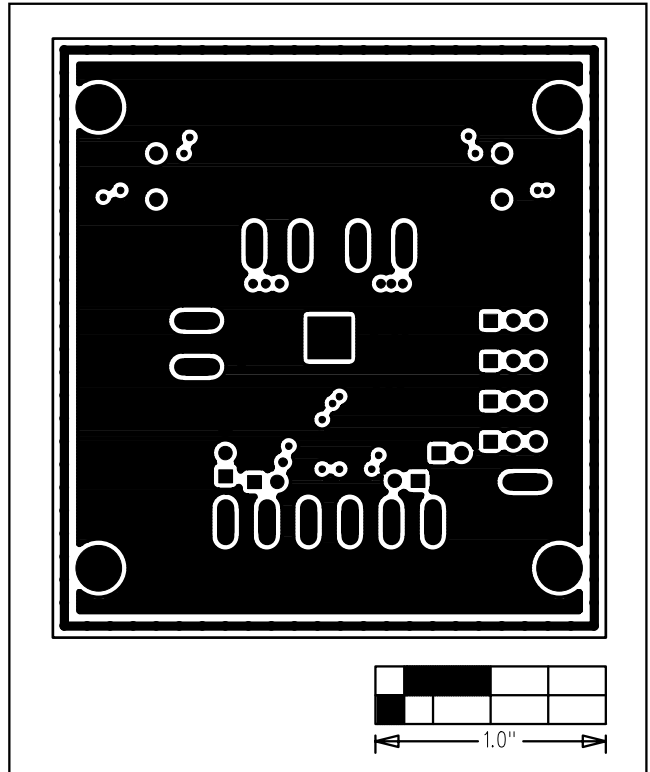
MAX9714 EV Kit PC Board Layout—Layer 3 (VDD)
